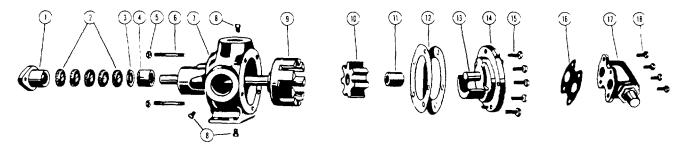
EXPLODED VIEW MODEL G432 PUMP
